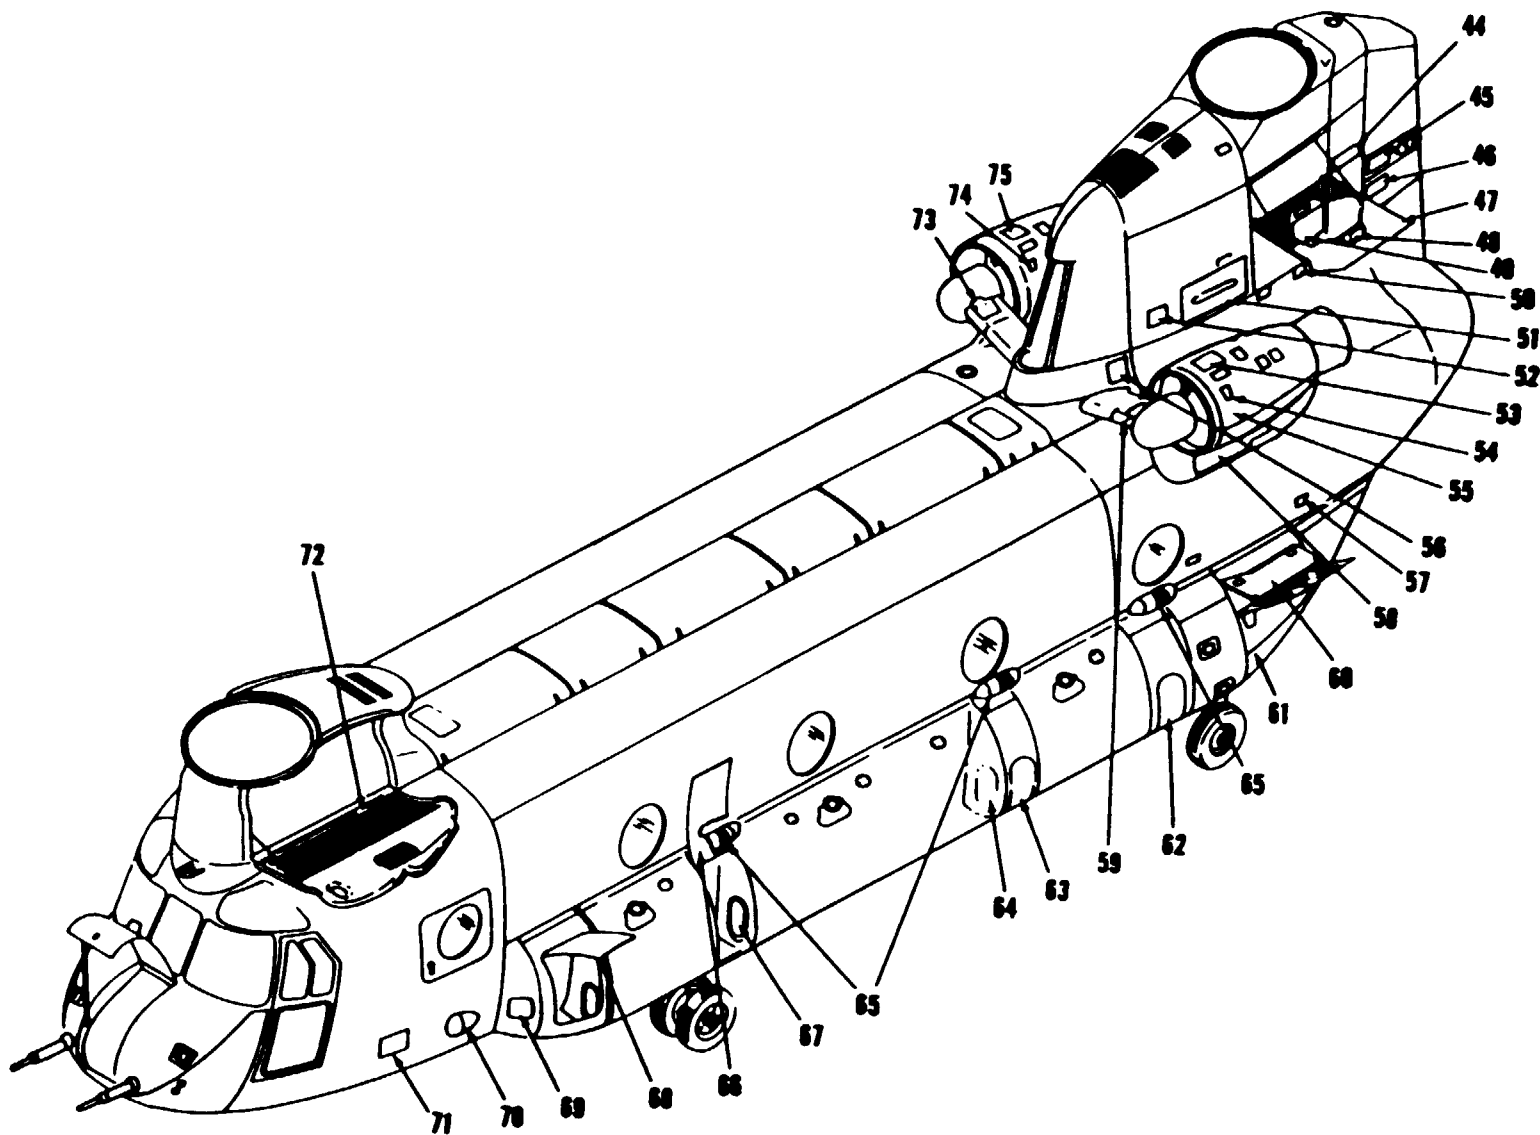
Access Doors, Covers, and Panels (Sheet 2 of 4)
